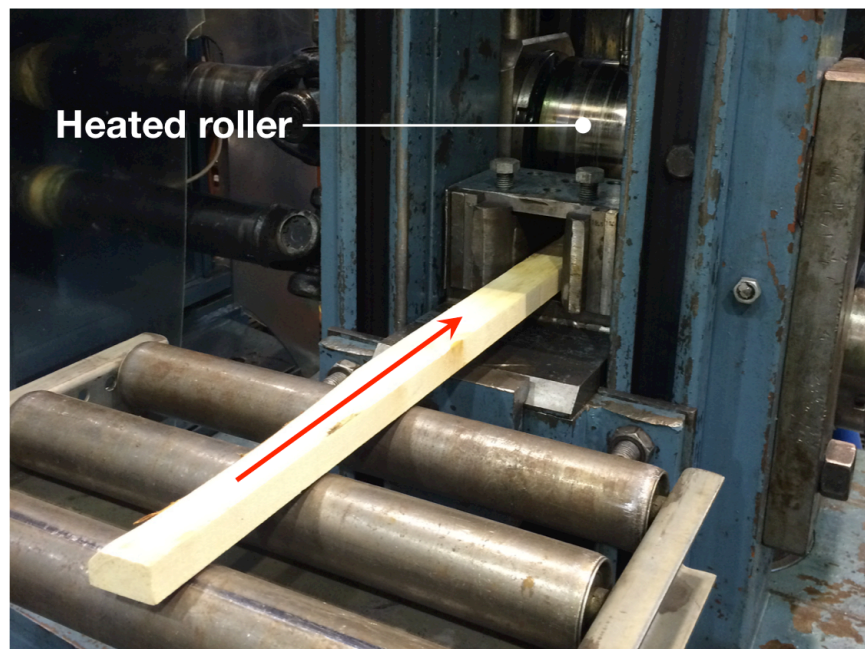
The roller pressing equipment. The upper roller was heated. The lower roller is not visible in the photograph.
